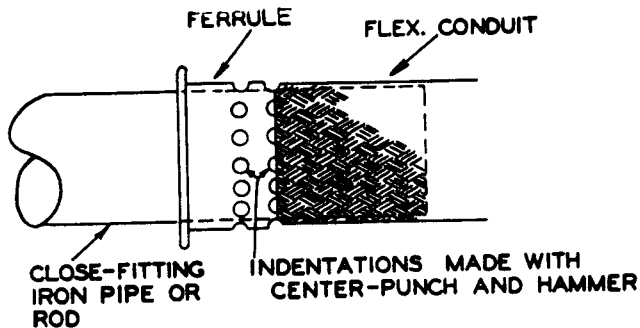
TEMPORARY METHOD OF CRIMPING FERRULE
